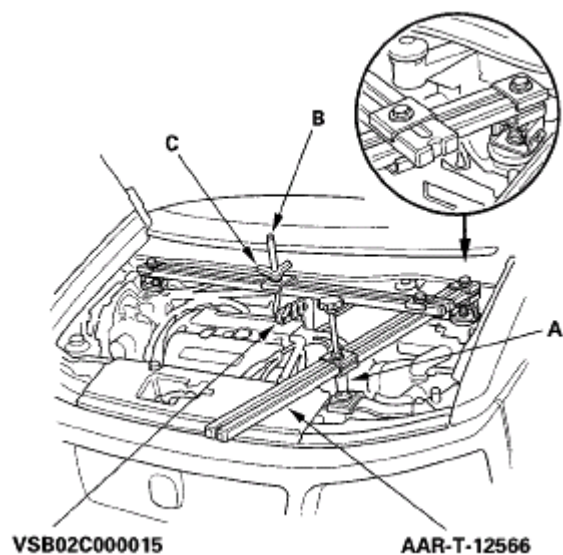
Identifying Front Leg Assembly, Hook, And Wing Nut Onto Engine Support Hanger
